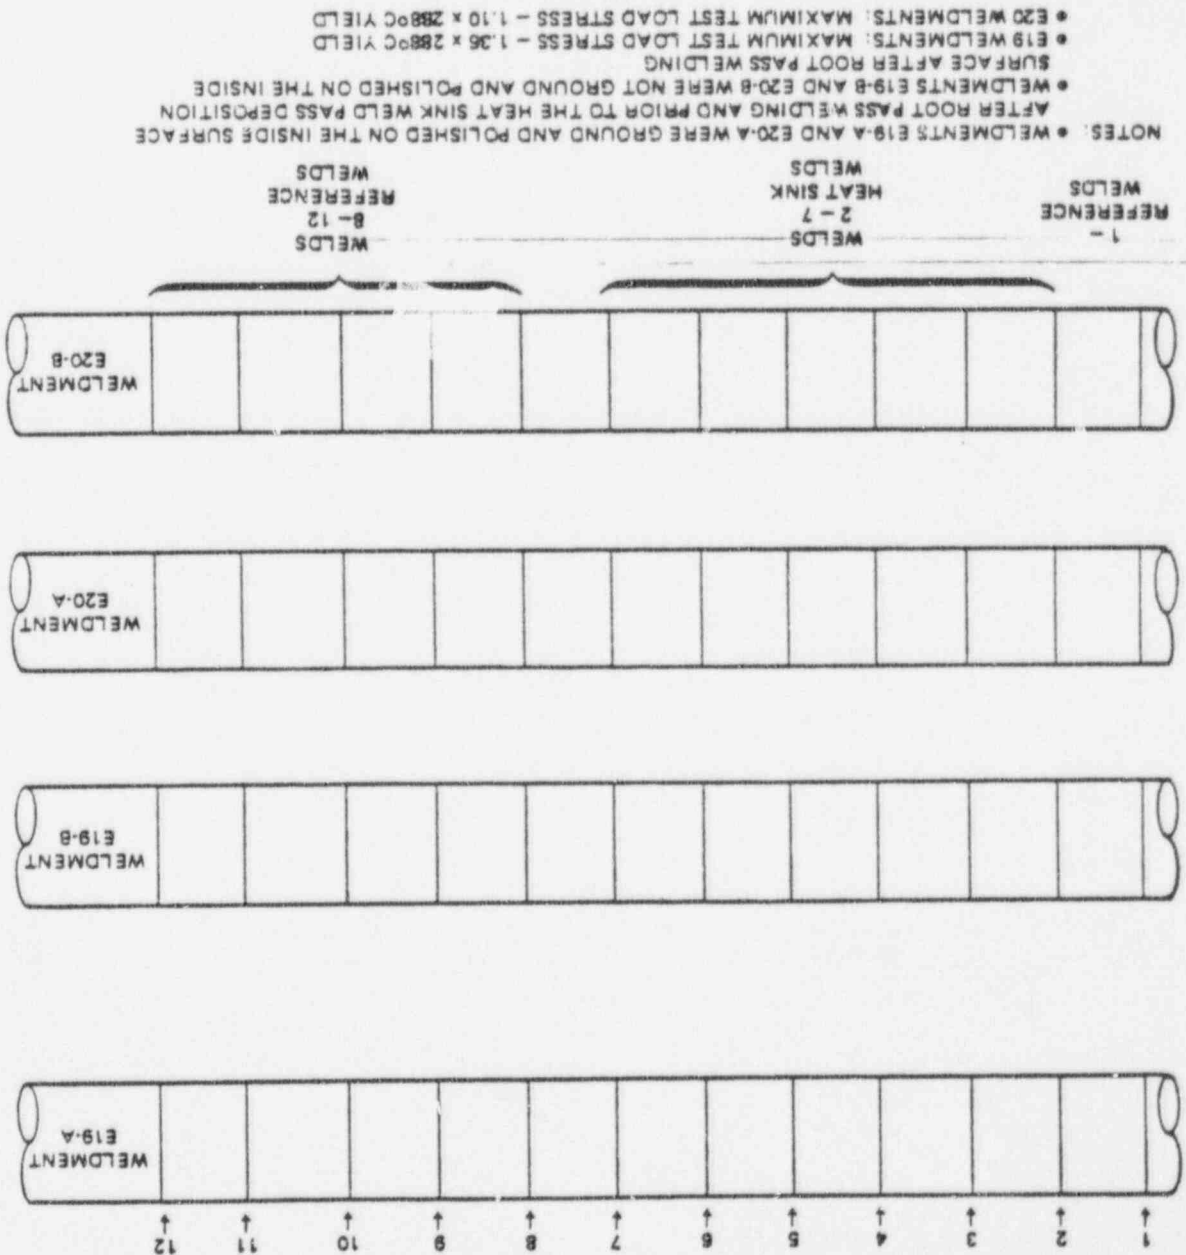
Bechtel Fabricated Heat Sink Weldments (Fully Automatic-2G Position - Type-304 Stainless Steel Pipe)
